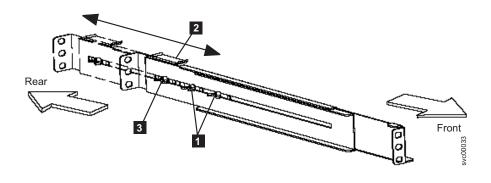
Adjusting the rail depth on the 2145-1U uninterruptible power supply
